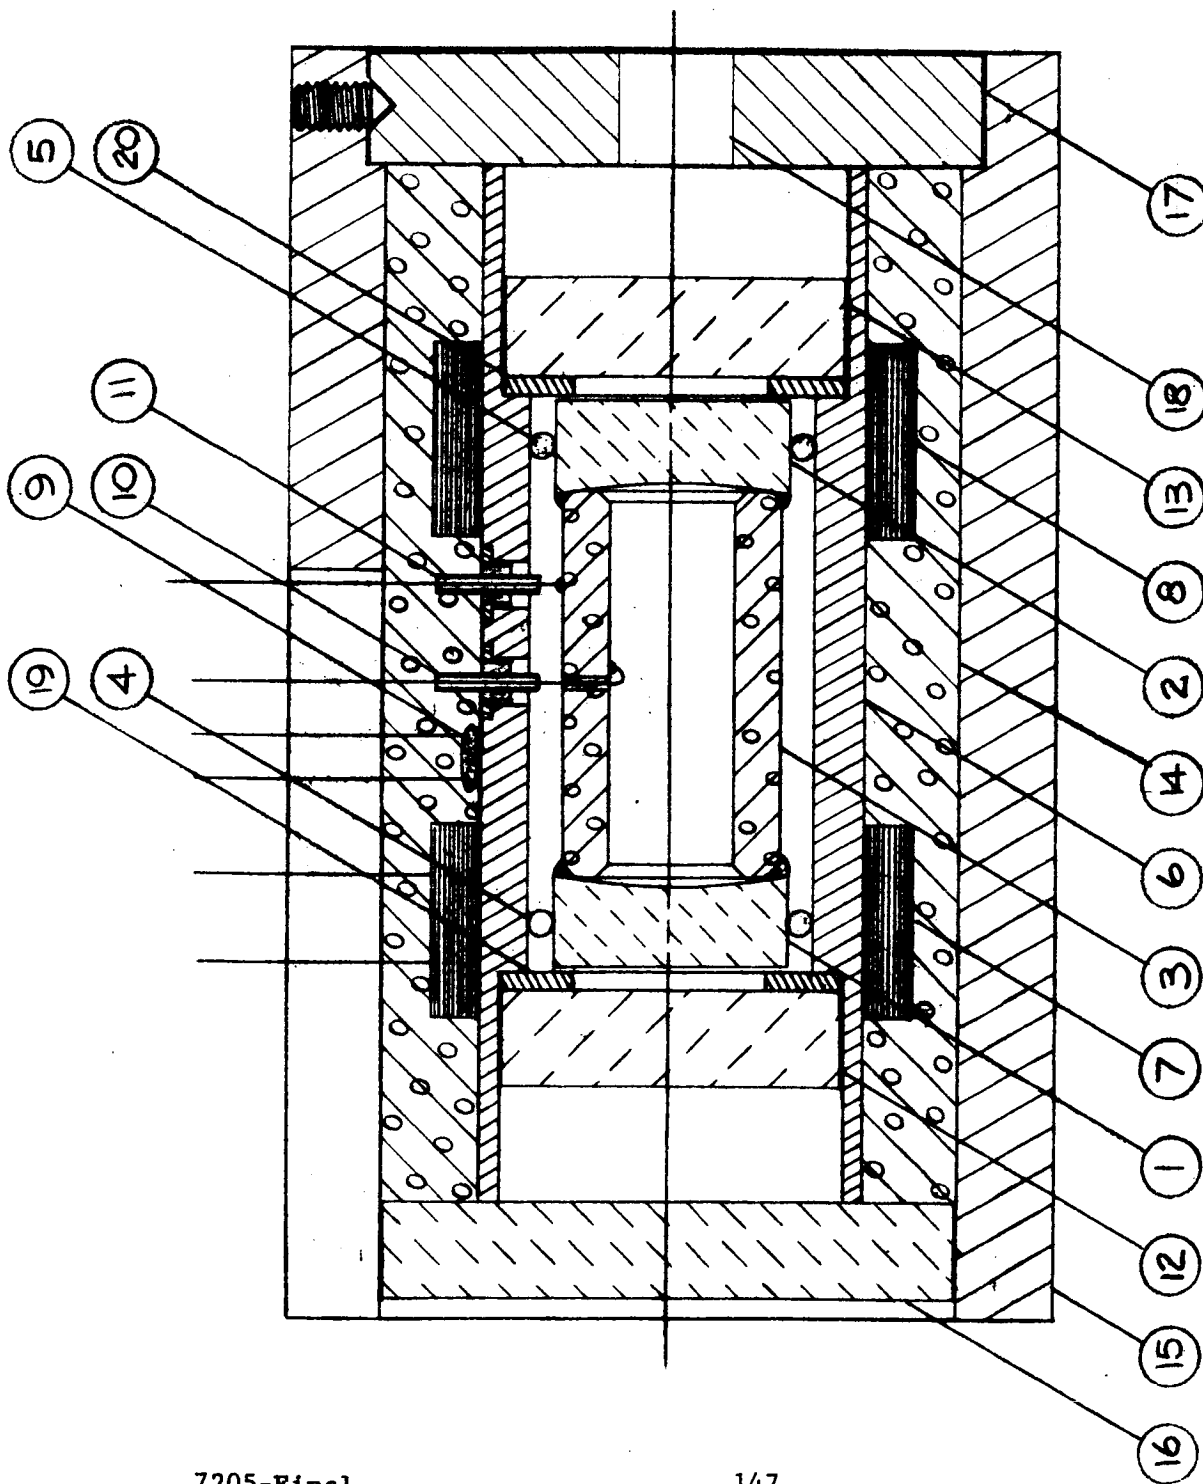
Optical Cavity Layout (overall dimensions 2.0 in. diam by 3.3 in. long)
